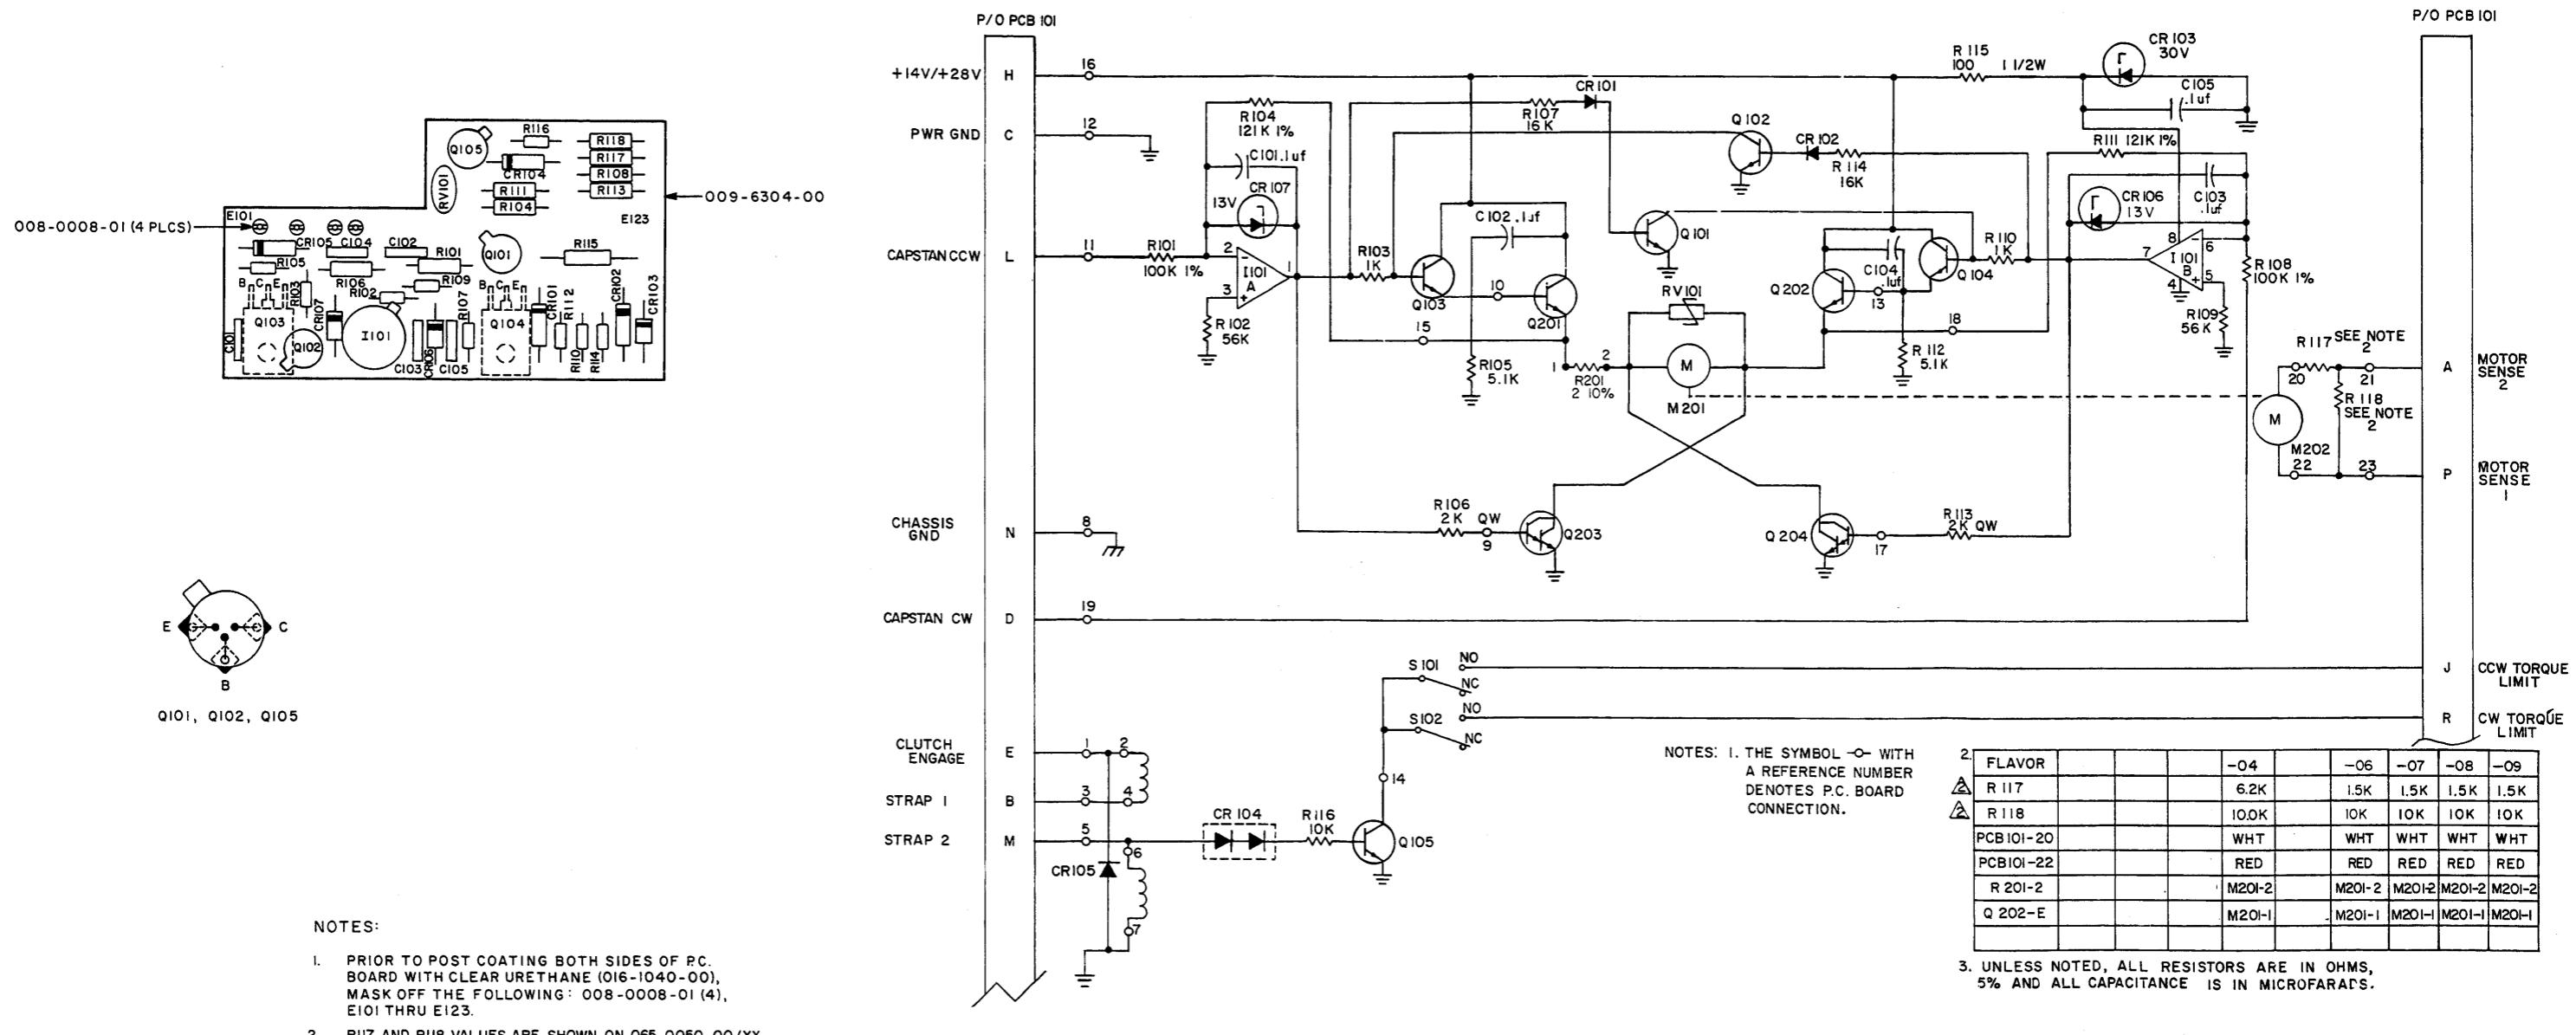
KS 177 PITCH SERVO PC BOARD ASSEMBLY AND SCHEMATIC
